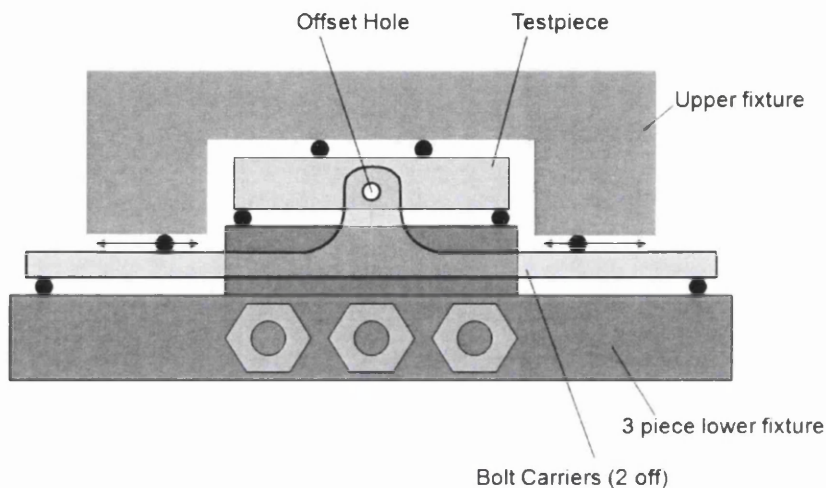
Four Point Bend Test for Bolt hole Fretting Fatigue Tests
